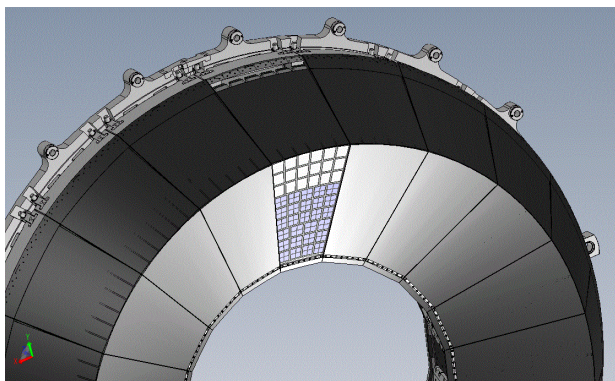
Layout of a module in the forward endcap in the hybrid plan.
